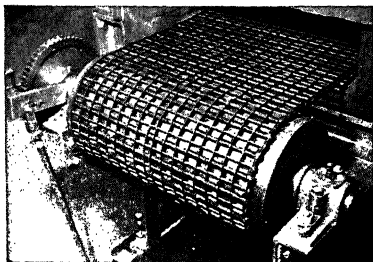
Open design of belt constructed from alloy sheet stampings joined with alloy steel cross rods and tube spacers.
